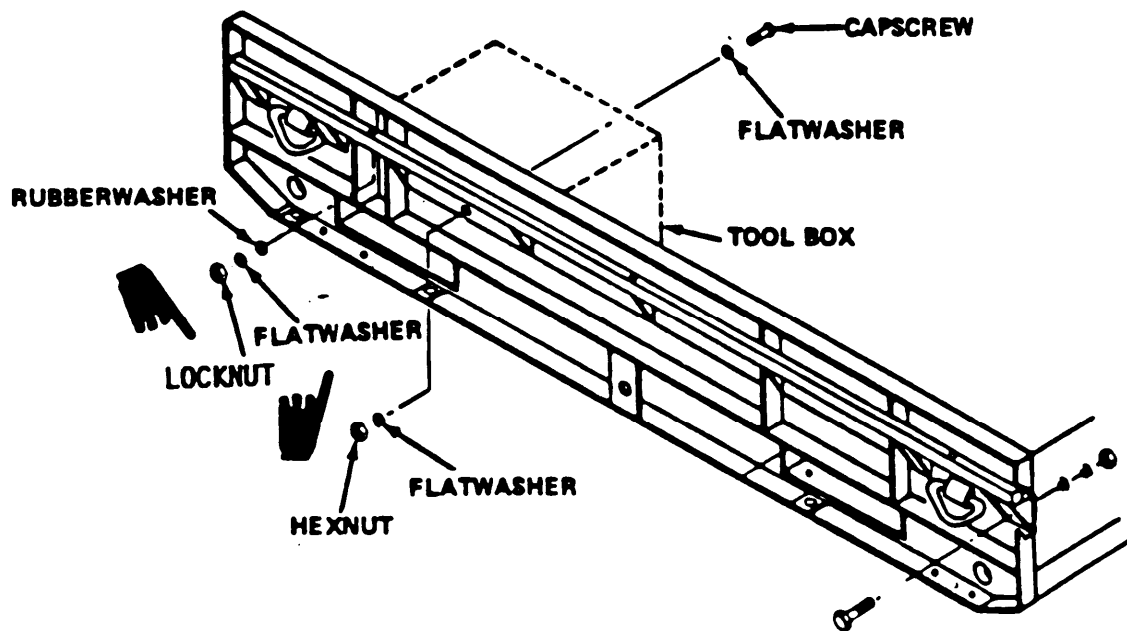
Mounting Hardware and Hole Location for Side Panel Assembly
